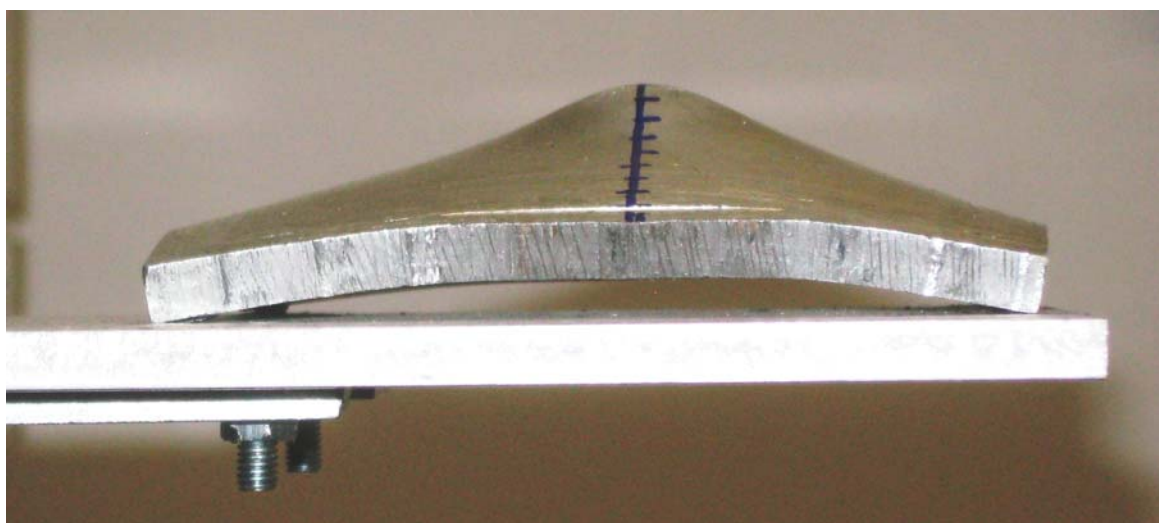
Aluminum backing plate behind 6.5 mm thick TiB plate
